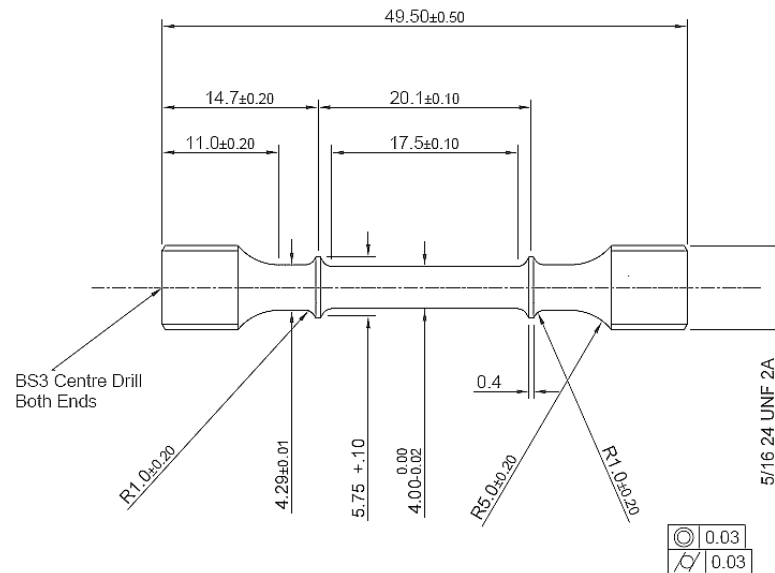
Dimensioned drawing showing 14G creep specimen.
